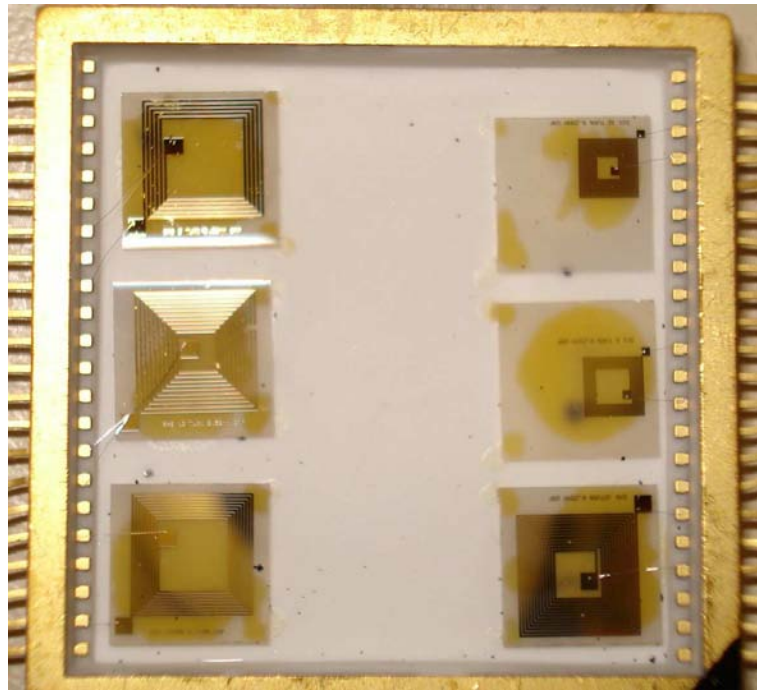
The fabricated miniature coils mounted on a 54 pin DIL carrier.
